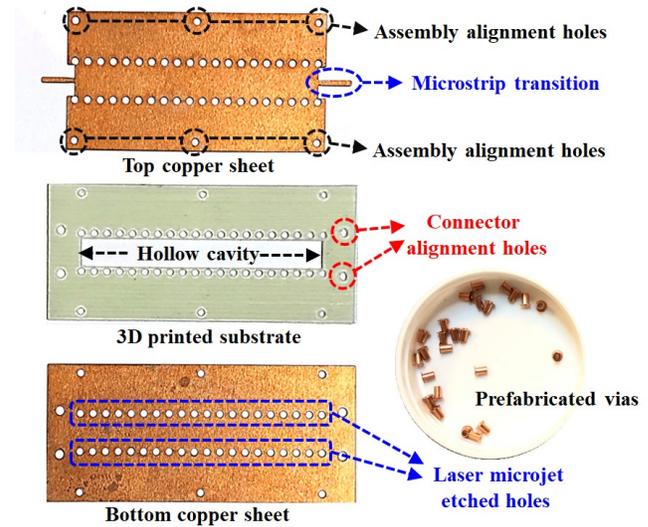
Fabricated HSIW prototype before assembly, which consists of the top copper sheet, 3D printed substrate, the bottom copper sheet and prefabricated vias.
